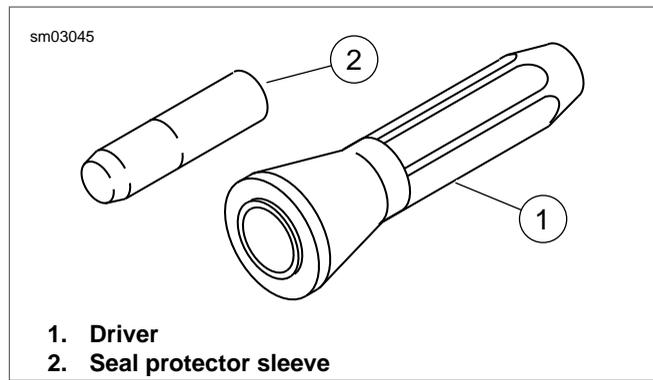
Installing Transmission Side Needle Bearing in Main Driver Gear
